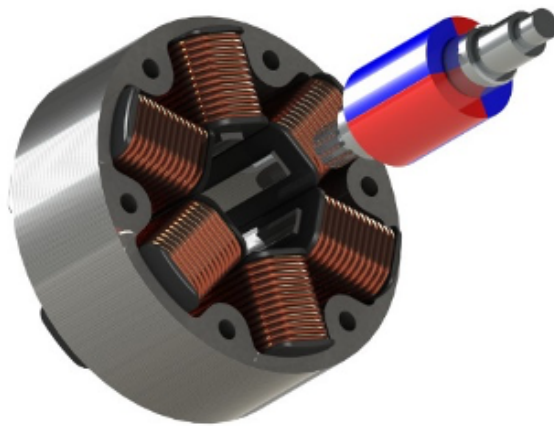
View of the electric motor (Moving Magnet Technologies)
